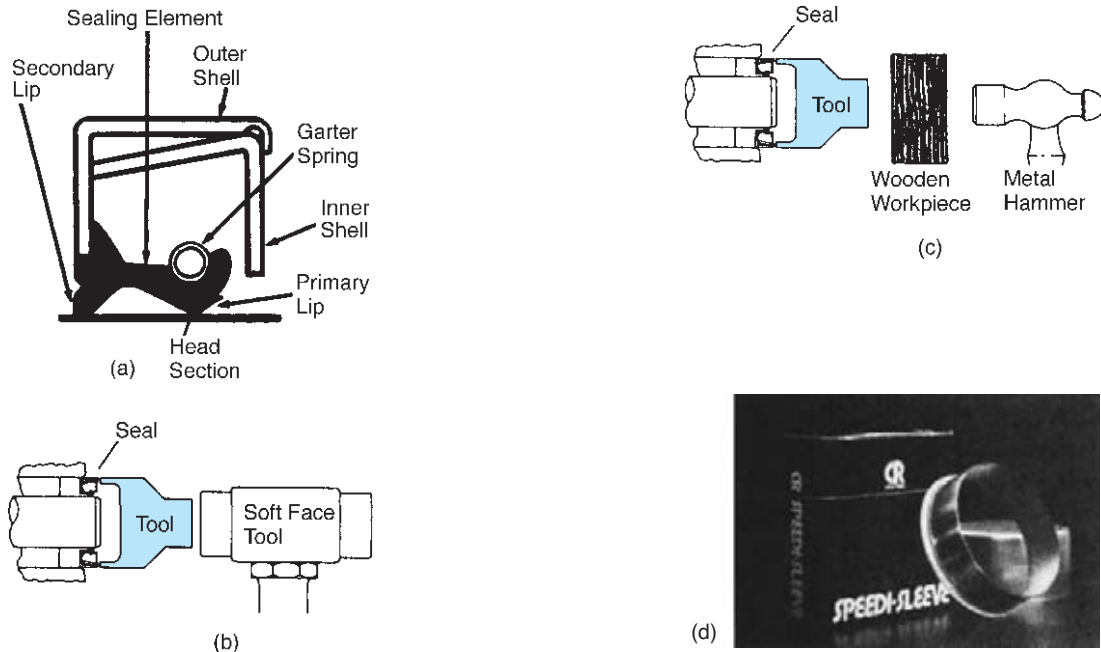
Improper installation can damage the outer shell of a seal or dislodge the garter spring (a). A new seal should be driven straight in using a seal driver and a soft-face hammer or block of wood to cushion the impact of the driving tool (b and c). If the sealing surface on the shaft is damaged, a thin sleeve can be installed over it (d). (Courtesy of CR Services)
